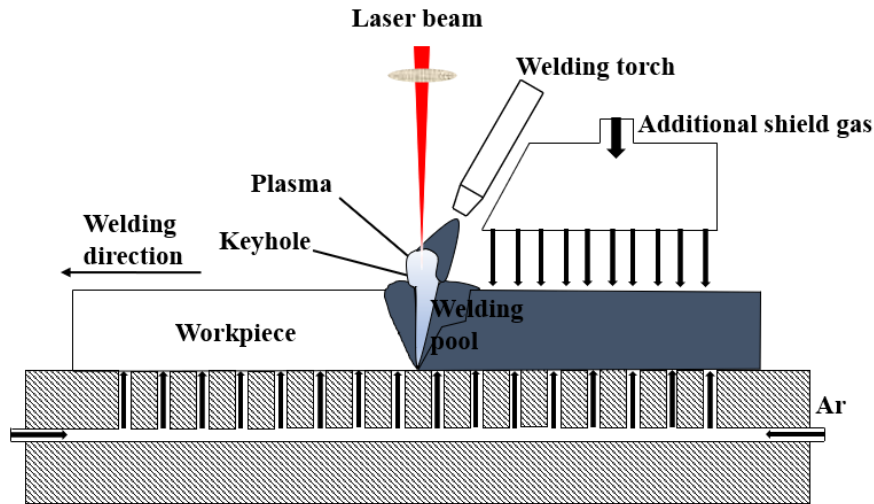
Schematic diagram of laser-MIG hybrid welding process
